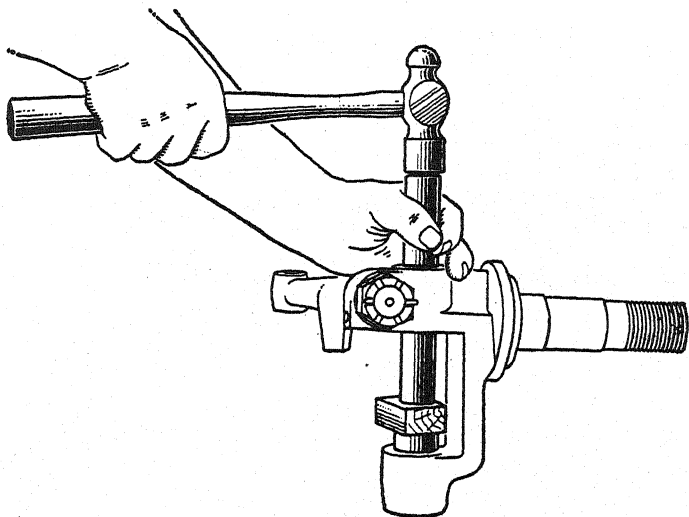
Installing new steering knuckle or "king pin" bushings.
